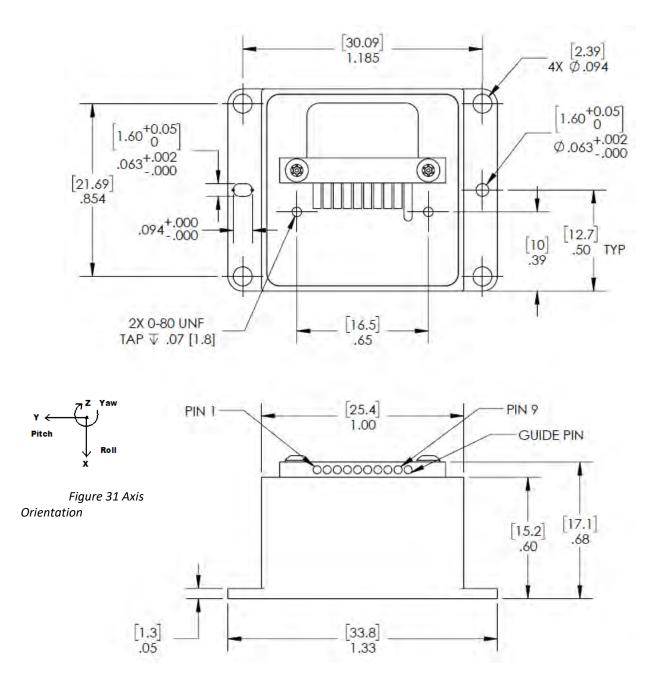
G300D Triaxial Digital Gyro Exploded Outline Drawing (metric in [mm])
